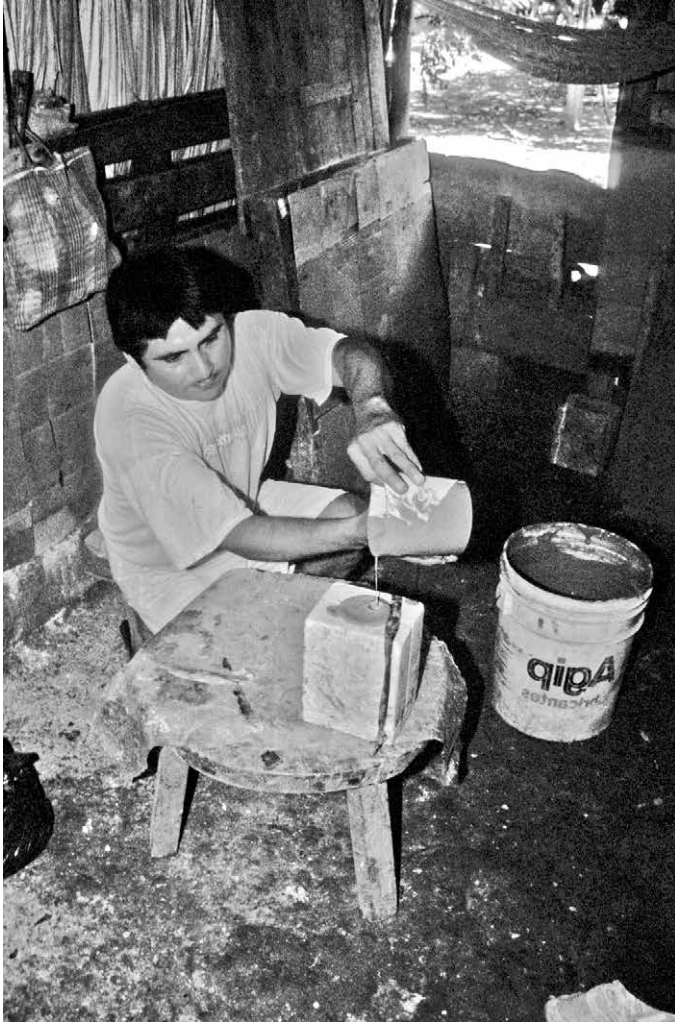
A Ticul potter using the slip casting technique in 1997. The vertical half mould is held together by an elastic band, and liquid clay mixture is being poured into the mould.
